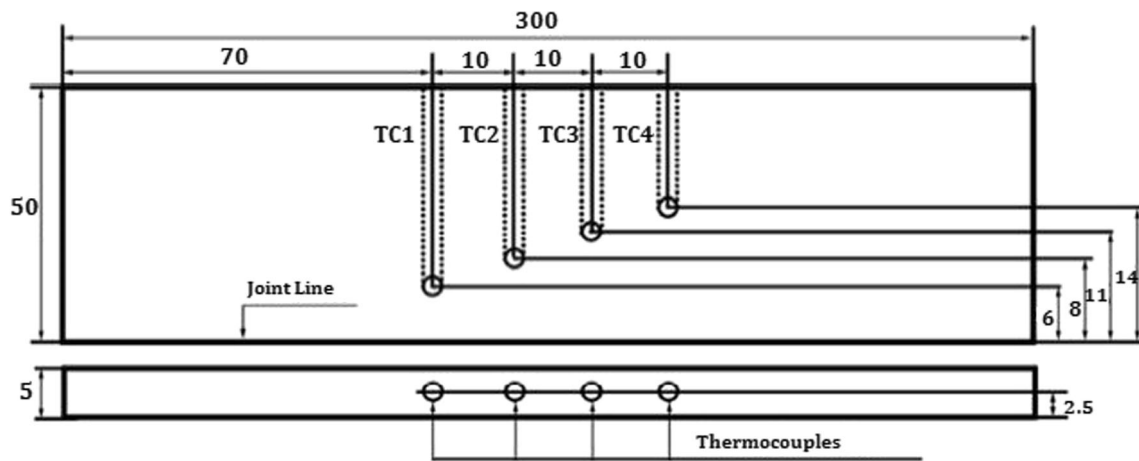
Thermocouples placement in the weld plate in air and immersed FSW
